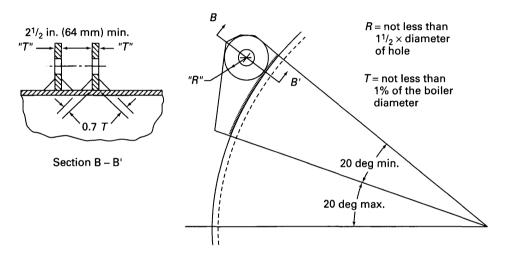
(b) WELDED BRACKET CONNECTION FOR HORIZONTAL-RETURN TUBULAR BOILER
